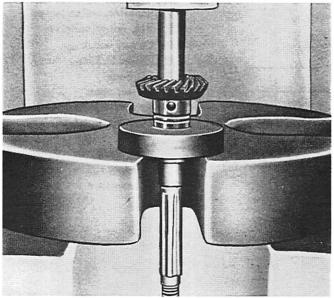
Pressing Off Propeller Shaft Gear Section III - Lower Unit Master Service Manual
